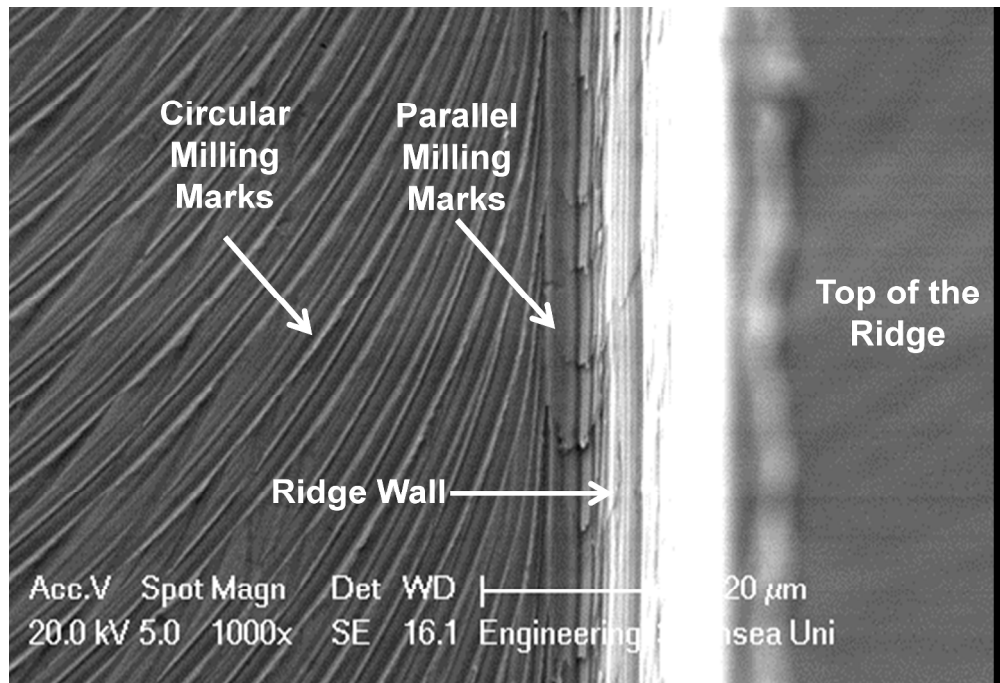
SEM image of the bottom corner of a 400 μm ridge on the mold insert.
